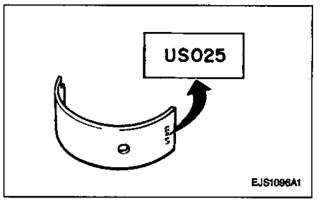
0.25 mm (0.0098-inch) Undersize Connecting Rod Bearing
